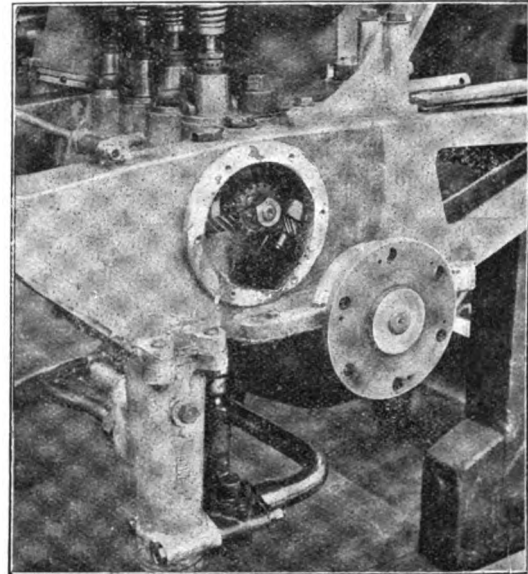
Rear View of Engine, showing method of operating the oil pump and the high-tension distributor.
